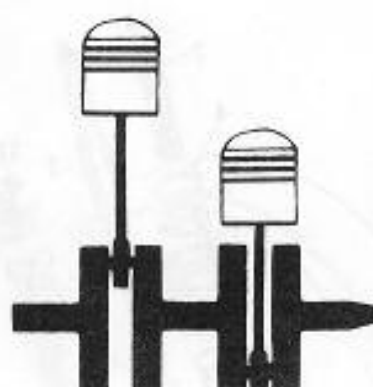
The ignition system for Type I engines includes two coils and two breaker points. The 180 degree crankshaft is shown above.
